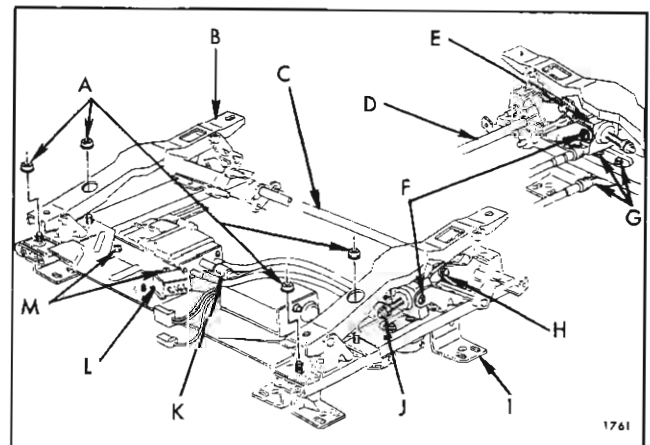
H24—Four-Way (Tilt) Seat Adjuster Assembly
